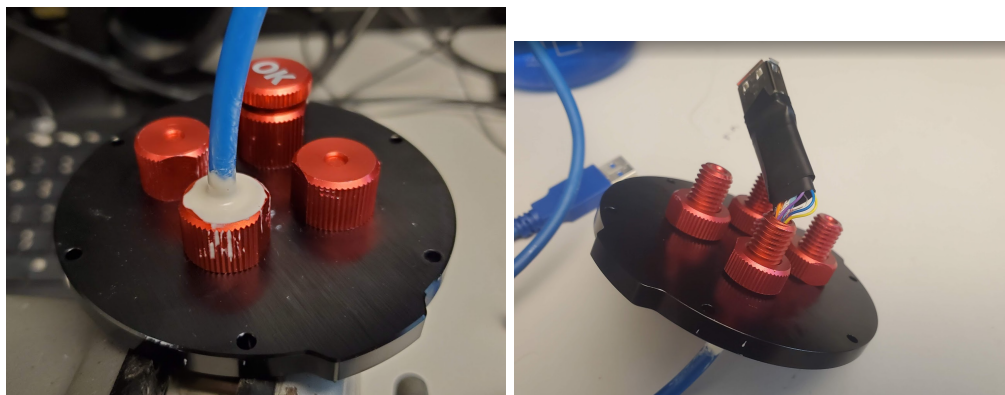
USB cable potted inside the waterproof penetrator and the Type-A receptacle soldered on the inside the enclosure to pass a USB 3.0 connection through the end-cap of the enclosure while maintaining the watertight seal.
